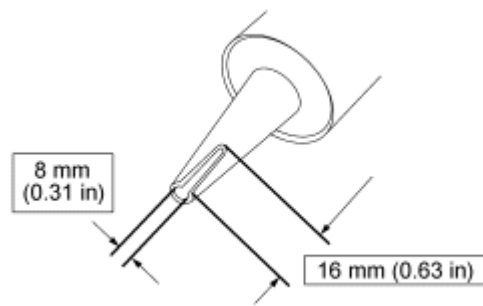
Cutting Urethane Adhesive Applicator Tip With Specifications
